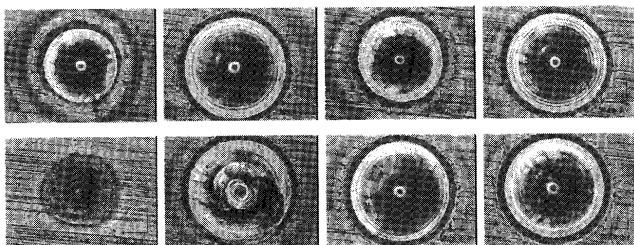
Surface photos of spot weld fusion zones in Cu sheets produced under adaptive control.
